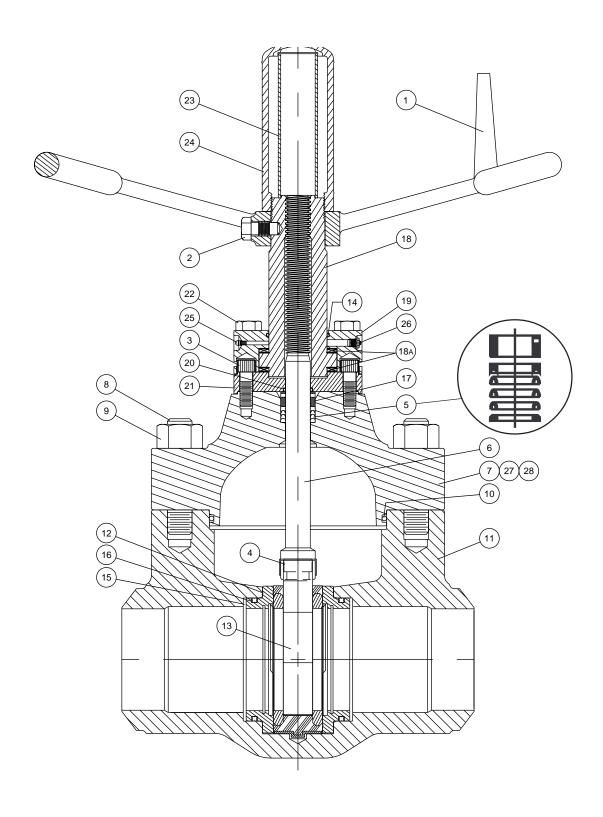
4", 5" and 6" Series DM 7500 Gate Valve
